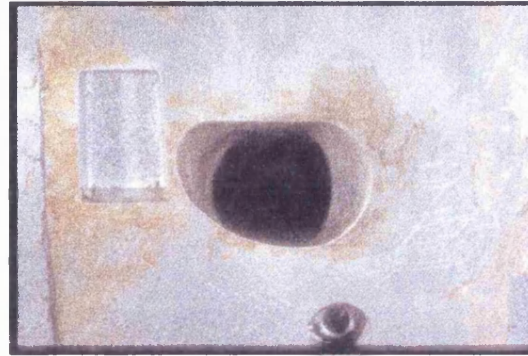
b: The modified Zetec cylinder head inlet port entry geometry
